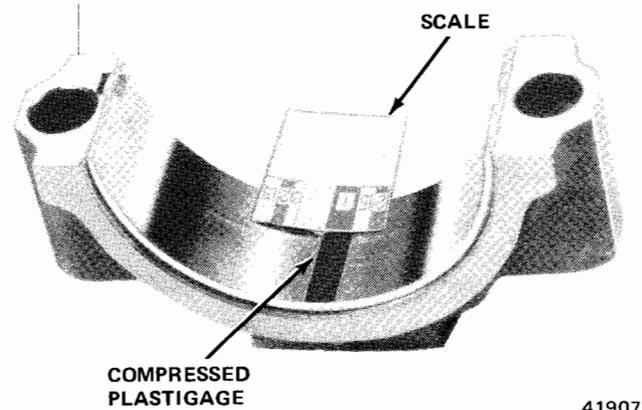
B-31 Connecting Rod Bearing Clearance Measurement with Plastigage
